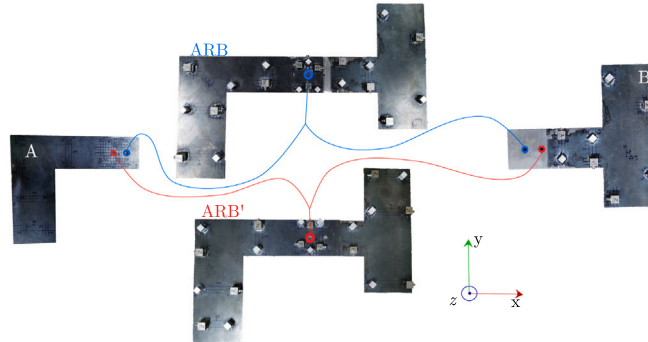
Assembling the metal sheet plates A and B into assemblies ARB and ARB'.
